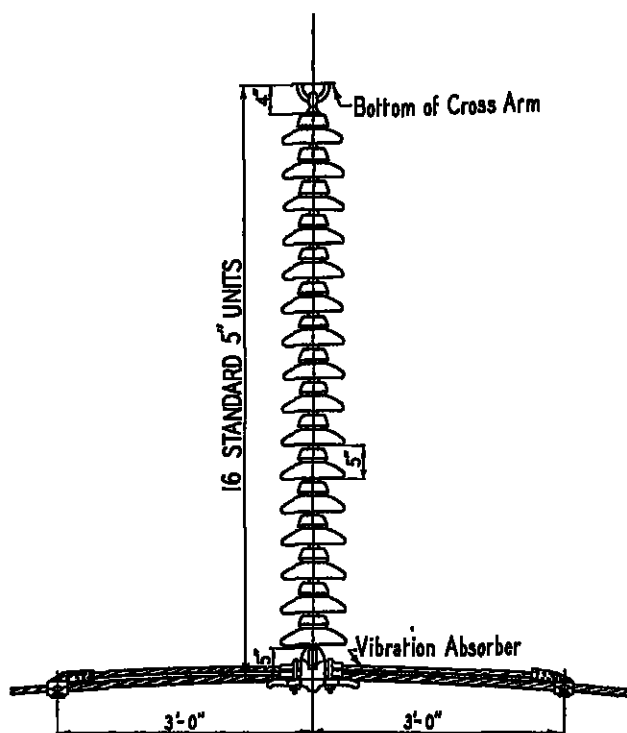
Suspension Insulator Assembly Toronto-Paigan Falls 220 kV Line.
